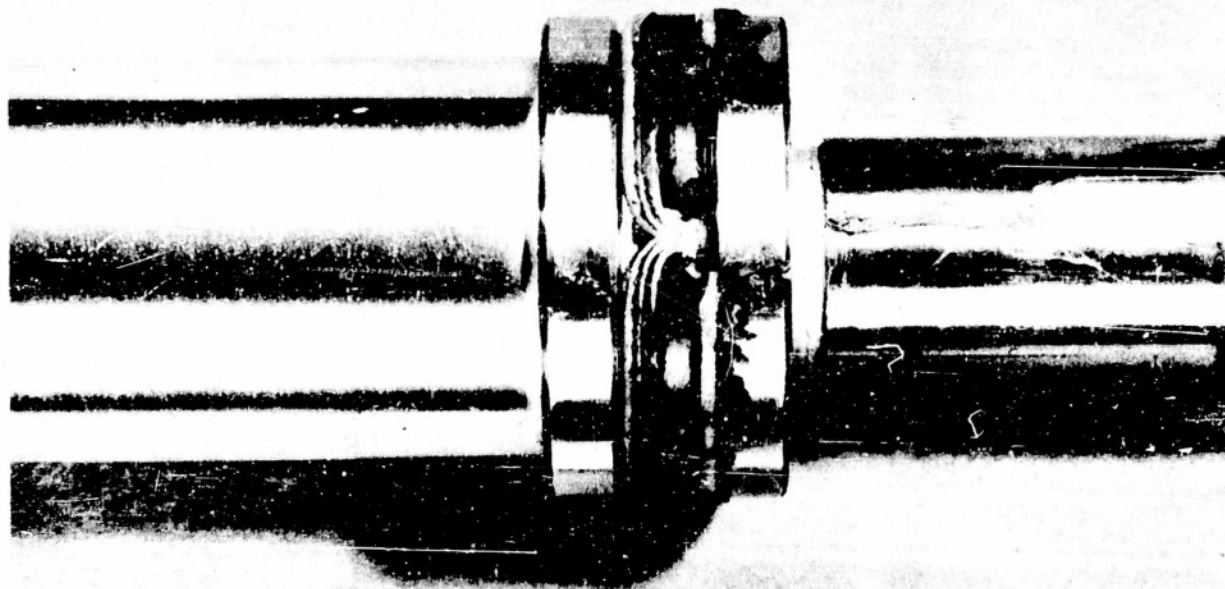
Figure IV - Neoprene "W" O-rings backed with glass loaded Teflon back-up rings. This seal failed after 22,000 cycles at 350°F. This is a typical "break-up" failure of the Teflon back-up ring.
